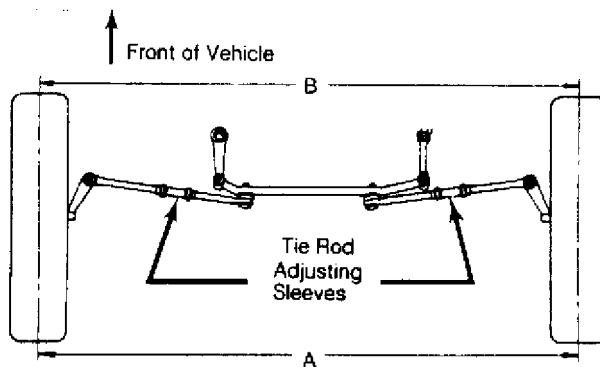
Adjusting Tie Rod Sleeves (Top View)
